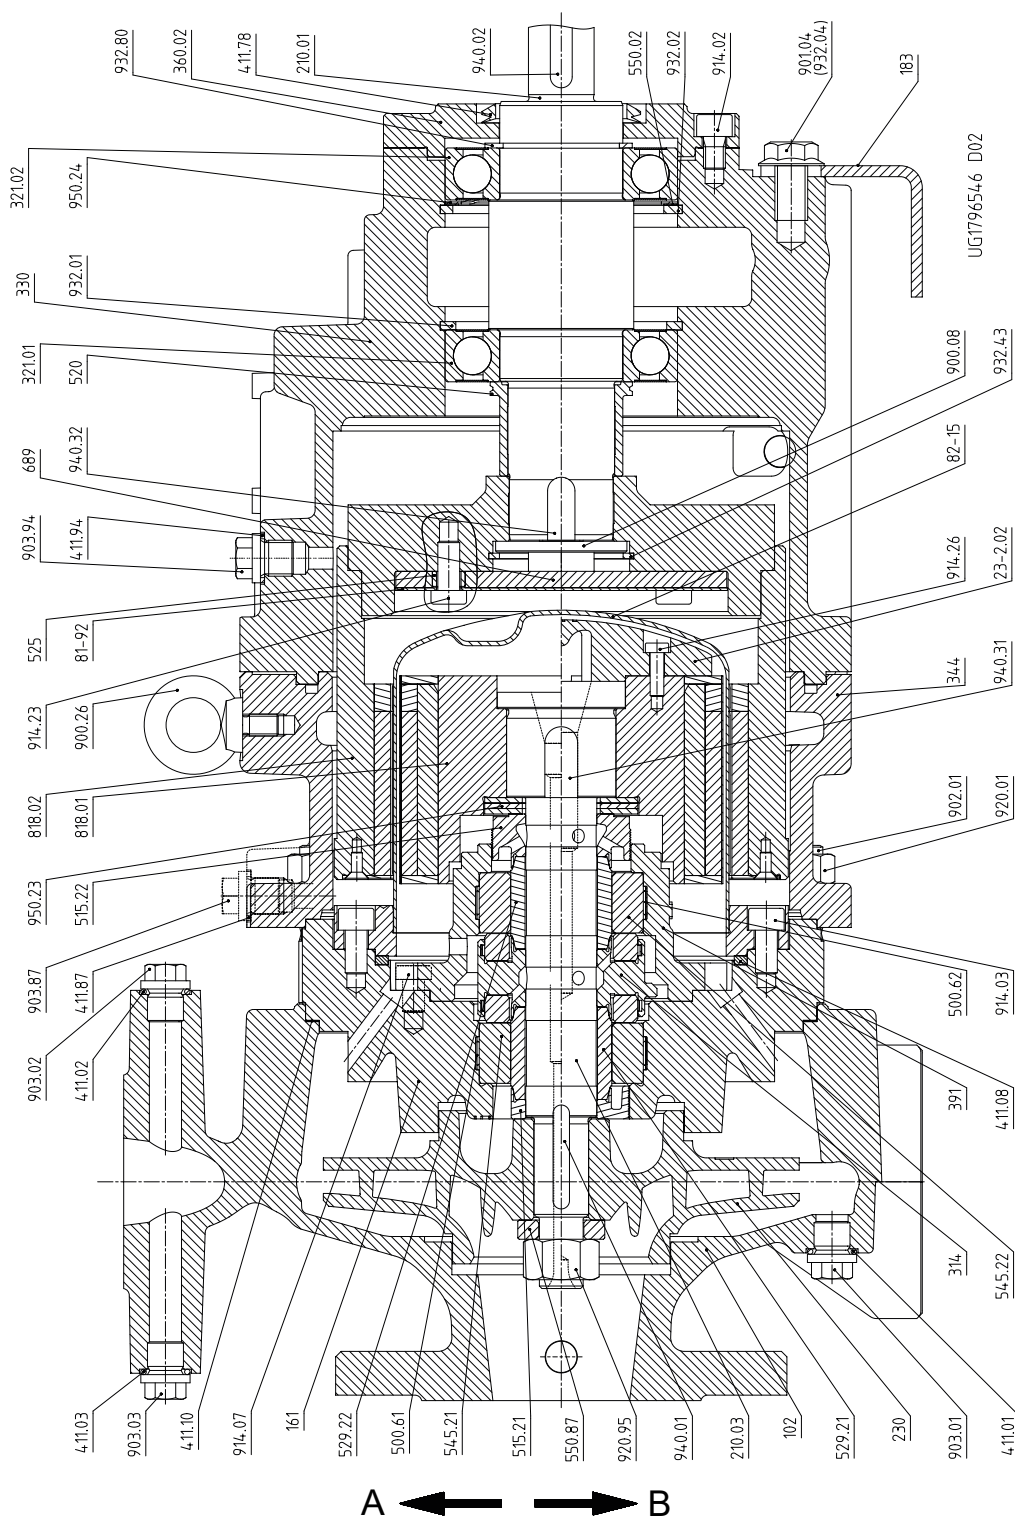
General assembly drawing of model with clamped cover, without intermediate piece
